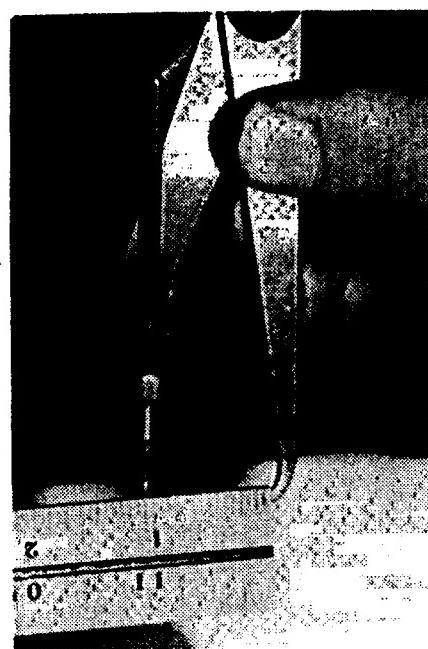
Transferring Measurement from Outside to Inside Caliper
